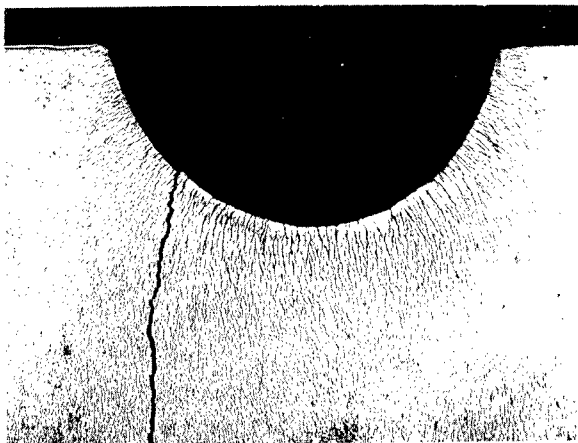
Outer surface of tube plate showing corrosion grooves radiating from tube hole (2 x)
